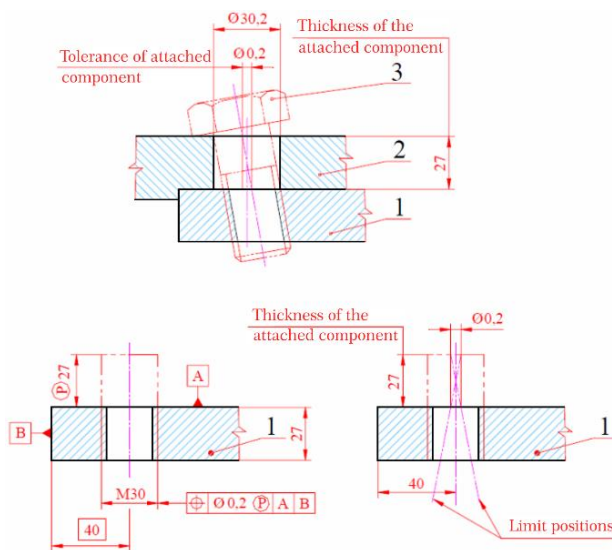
Example of application of the offset tolerance zone prescription for gearbox assembly
